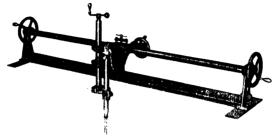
An automatic oxy-acetylene cutting machine (Courtesv of: Victor Equipment Company)
